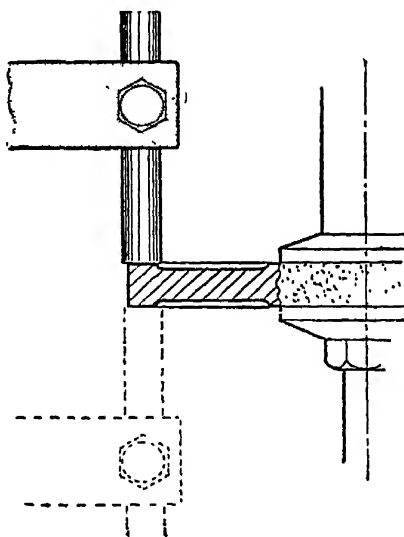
GRINDING ENDS OF SPINDLE GAUGE
